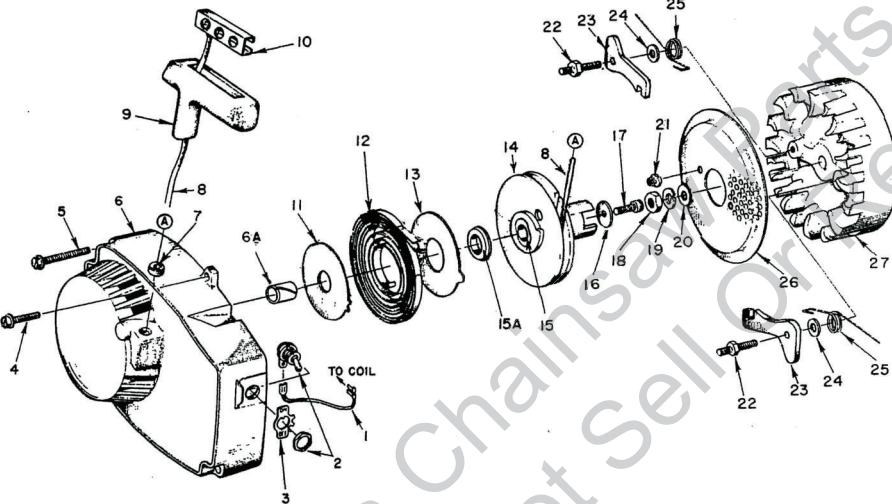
B—Exploded view of latest production rewind starter assembly. Pulley (14) and integral starter cup (see item 12, Fig. HL42A), together with spring lock (15) and spring lock bushing (15A), can be used to renew early starter pulley (11—Fig. HL42A) and separate starter cup. Ignition cut-off switch and wiring are also shown.
